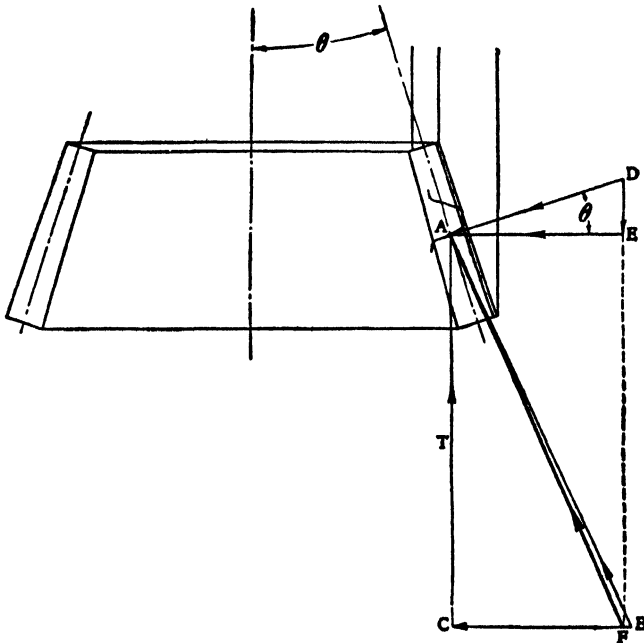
DIAGRAM OF COMPONENTS OF BEVEL-GEAR TOOTH PRESSURE.
